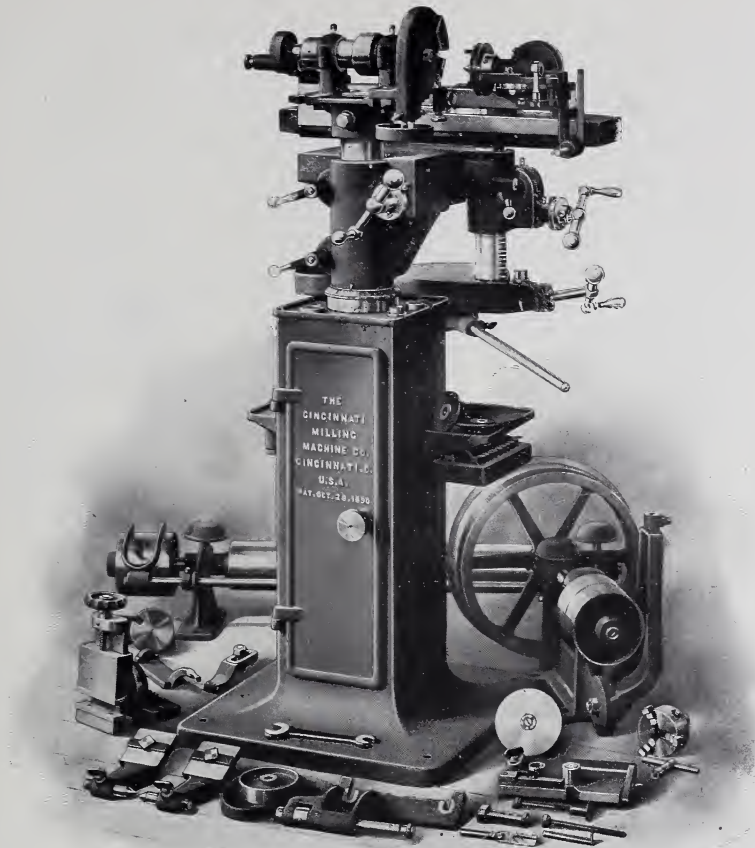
UNIVERSAL CUTTER AND TOOL-GRINDER MADE BY THE CINCINNATI MILLING MACHINE CO., CINCINNATI, OHIO
